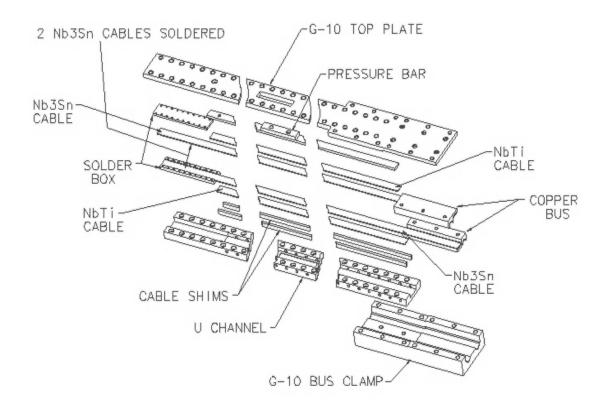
Exploded view of sample holder, showing samples, Cu splice box and lead attachments
